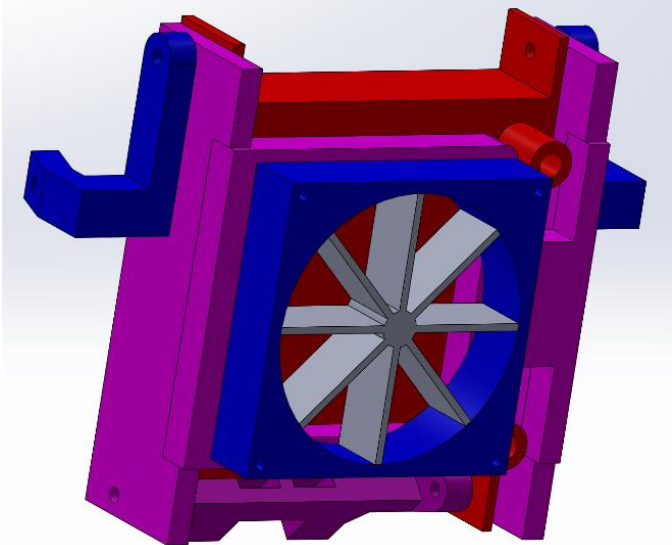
A SolidWorks model of the radiator and cooling fan mount.
